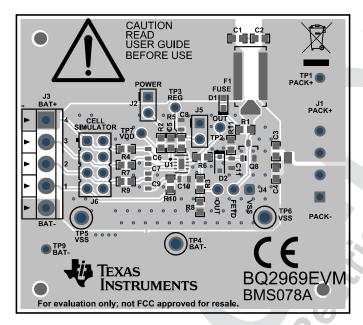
BQ2969 Two-Layer Board Layout - Top Layer
